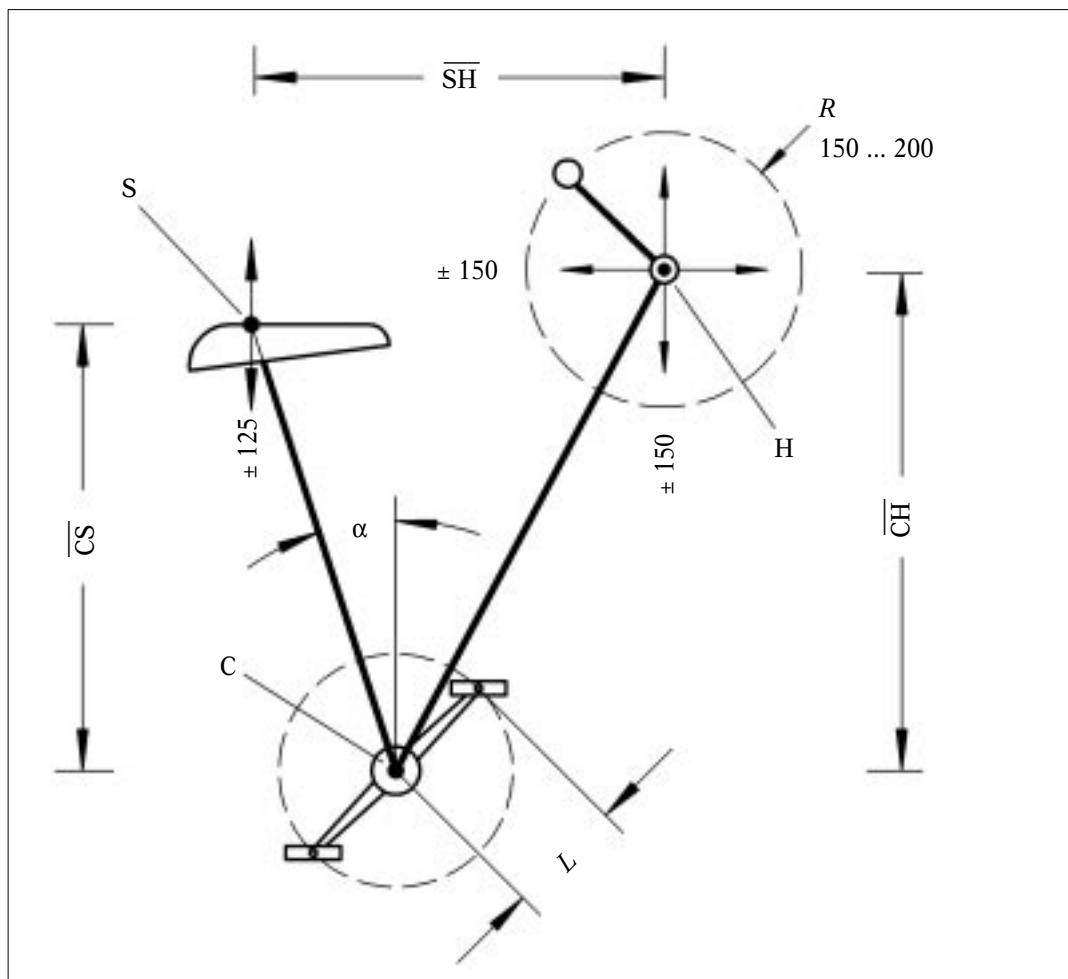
Definition of basic saddle position S, basic handle position H and centre of foot crank bearing C (dimensions in mm).
